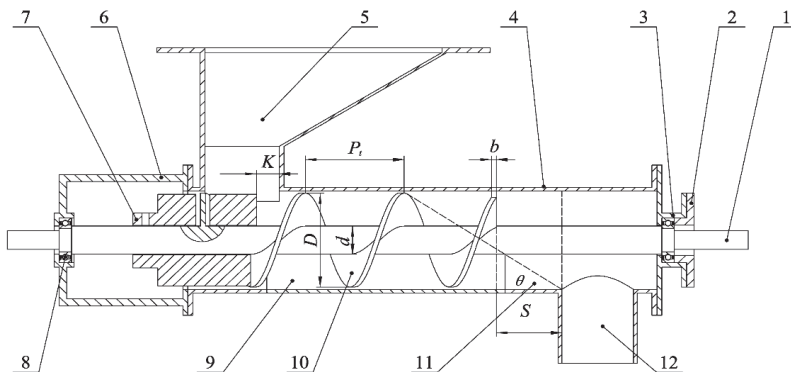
Structure of blocking wheel-type screw fertilizer distributor. 1. Screw shaft 2. Bearing cover 3. End cover of sleeve 4. Sleeve of screw 5. Pyramidal feeding inlet 6. Bearing seat 7. Spiral blocking wheel 8. Bearing 9. Fertilizer cleaning outlet and its cover 10. Screw blade 11. Fertilizer buffering zone 12. Fertilizer outlet. Note: D is the outer diameter of the screw blade, mm; d is the inner diameter of the screw blade, mm; P_t is the pitch, mm; b is the average thickness of the screw blade, mm; K is the spiral blocking wheel opening width, mm; S is the outlet distance, mm.
